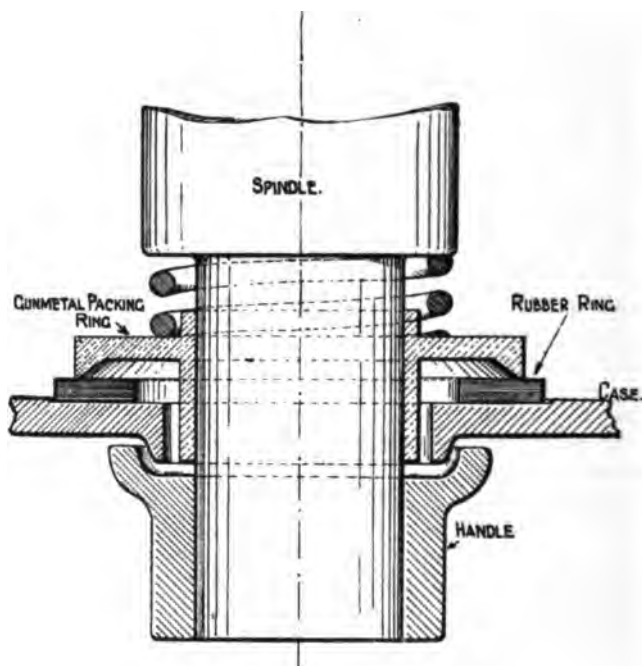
Section of Messrs. Reyrolle's Packing Ring for Gas-tight Motor Starters.
